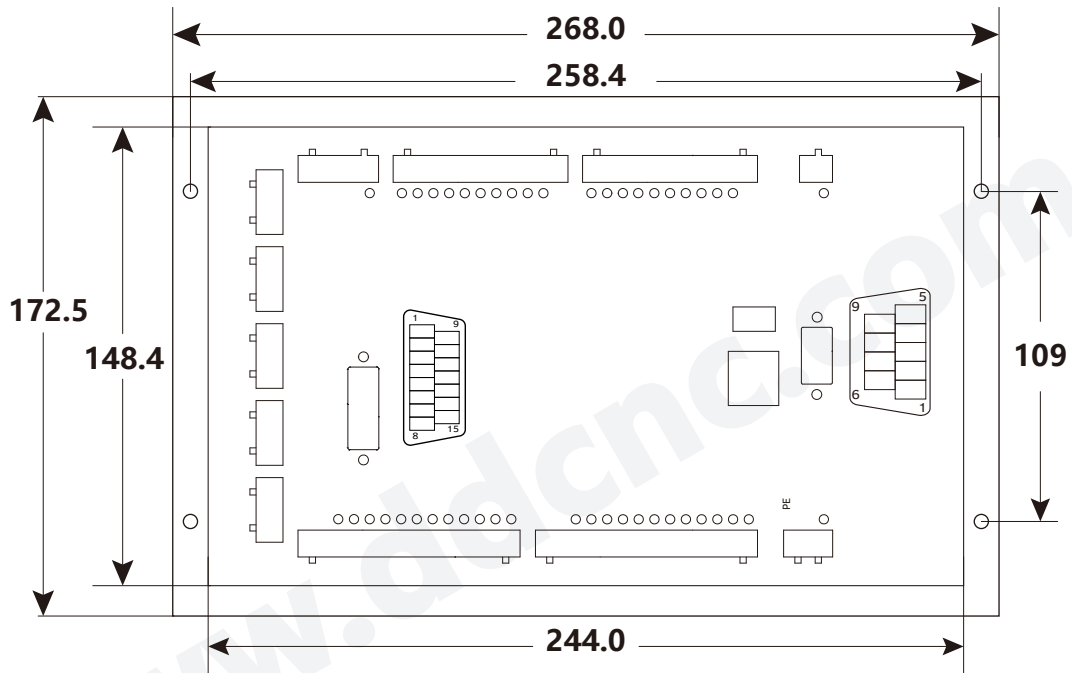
DDCS-Expert(DDCSE) Back view and dimensions
